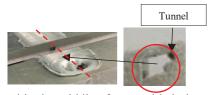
Tunnel in the middle of two welded pieces of AA6061
